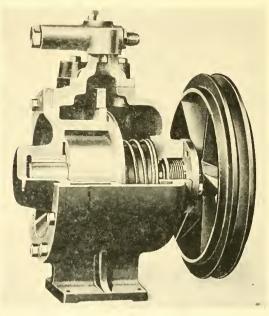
NORGE ROTARY TYPE COMPRESSOR.
